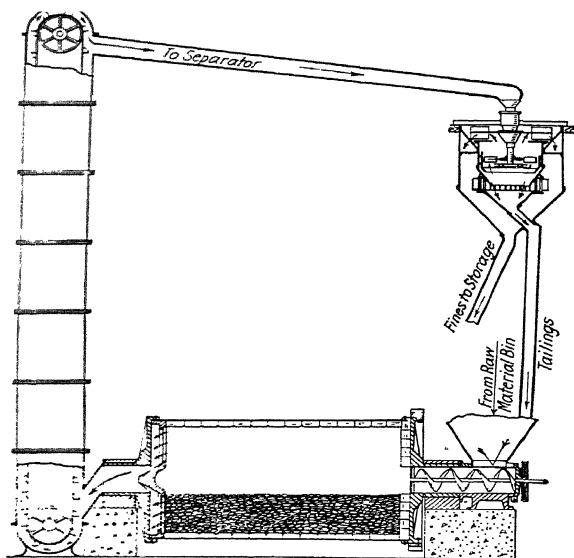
Cross section of a continuous ball mill. (Courtesy of Patterson Foundry and Machine Company.)
